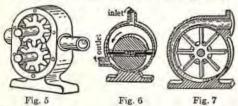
The gear type of circulating pump consists of two small gears with large teeth, the two being in mesh, and placed in a casing that fits as snugly as possible. The water enters at one side where the teeth separate and is carried around to the opposite side in the spaces between the teeth, where it escapes through an outlet. through an outlet.
